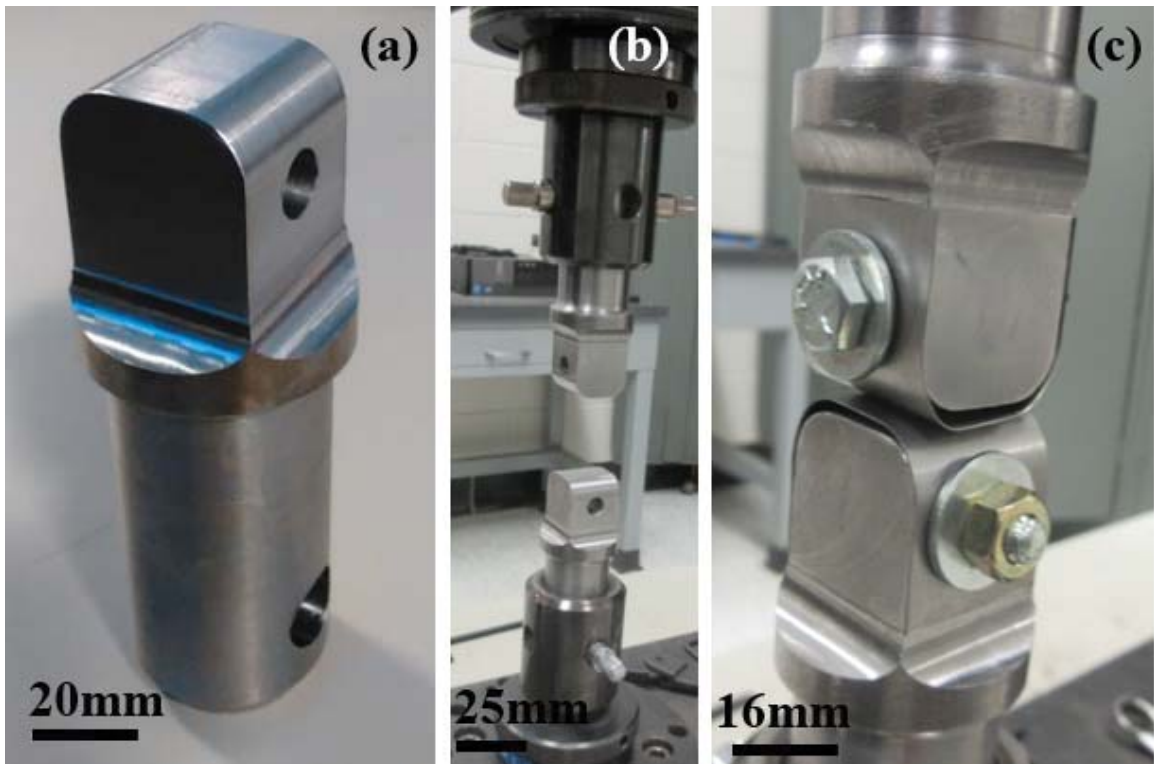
U-Tension Tensile (a) Specimen Holder, (b) Tooling in Instron (c) Specimen on Tooling
